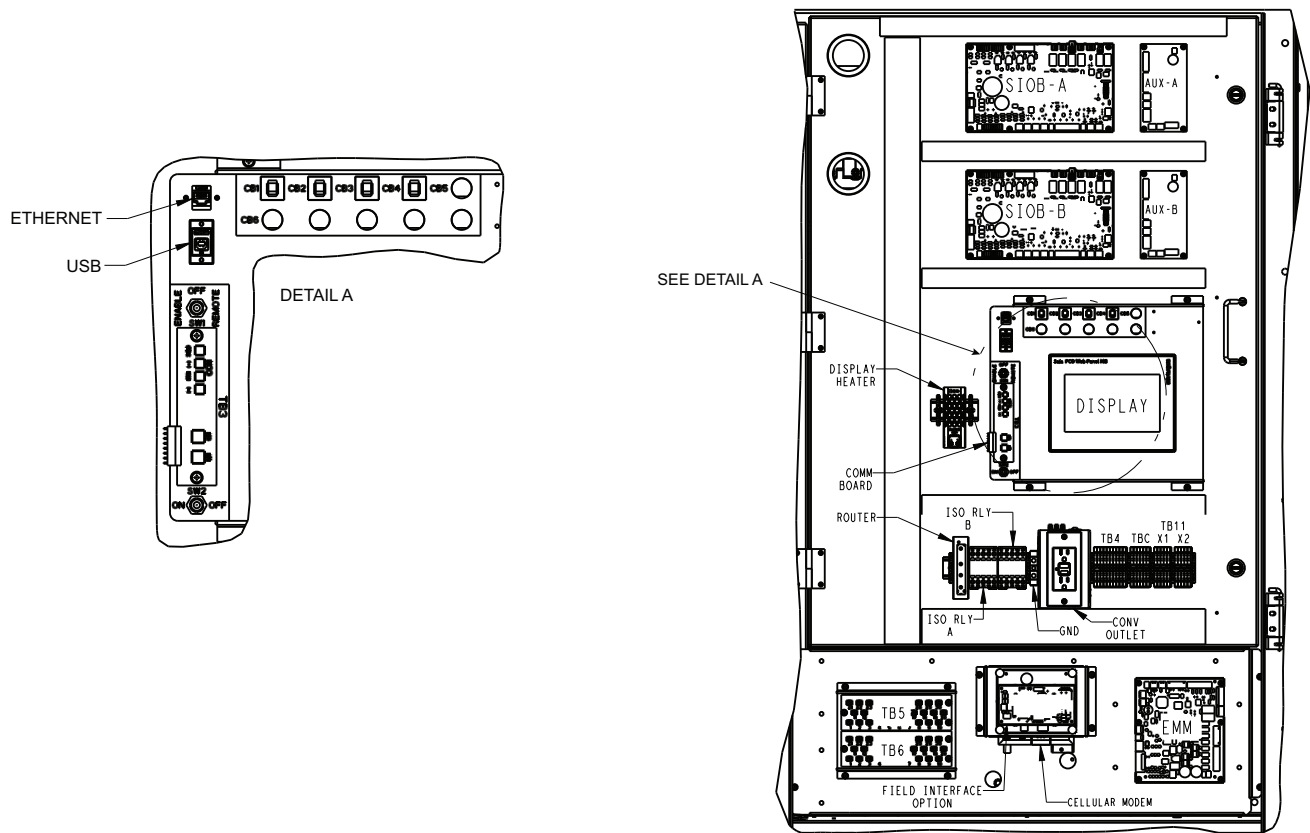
Component Layout Drawing (30XVB350-500 Shown)
